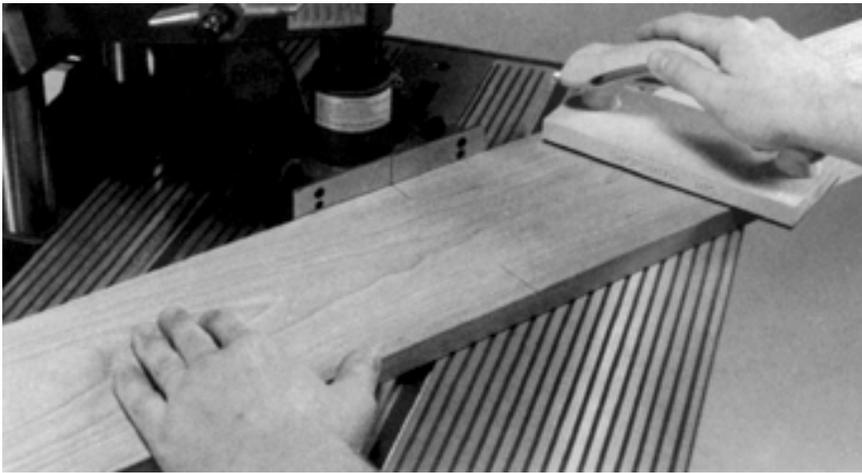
When working with large stock, mount the biscuit joiner diagonally for maximum support of the workpiece.
